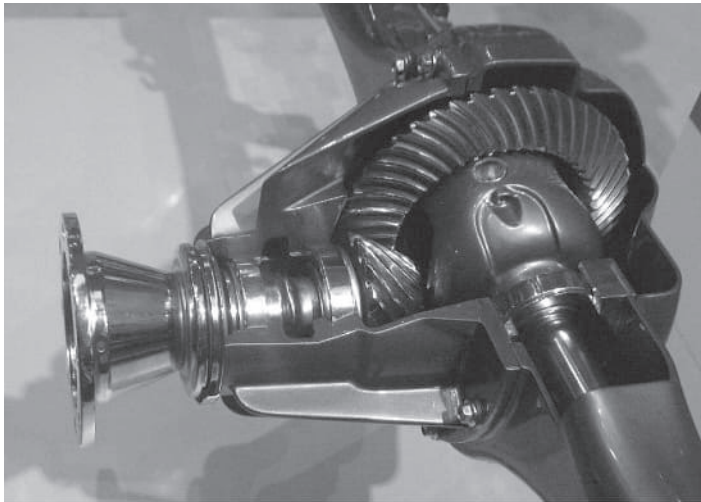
Crossed-axes gearing in the design of automobile differential.
